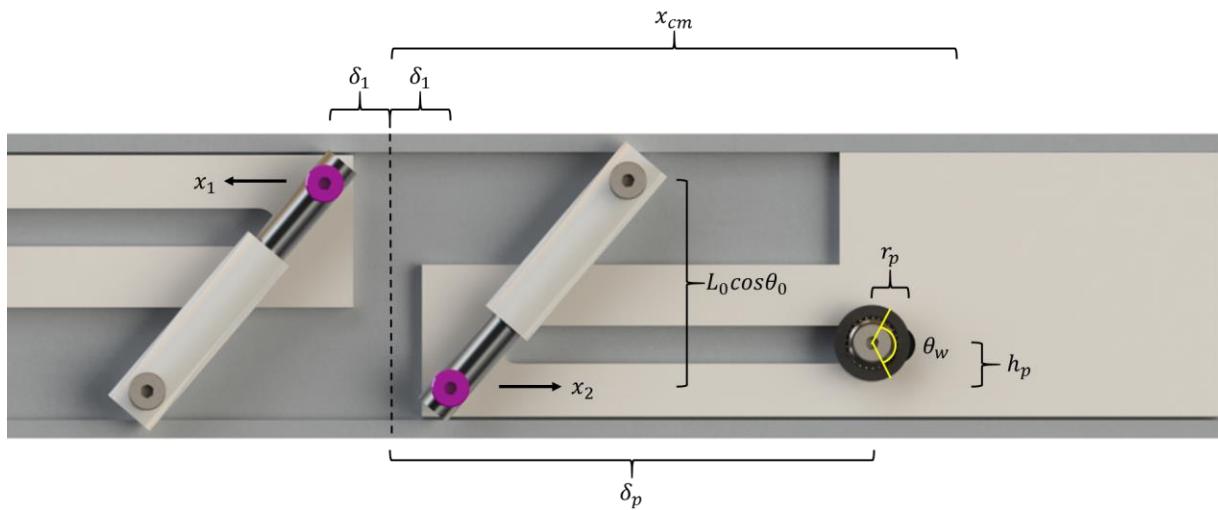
Prototype rotor schematic with dimensions specified to calculate synchronizing cable length.
